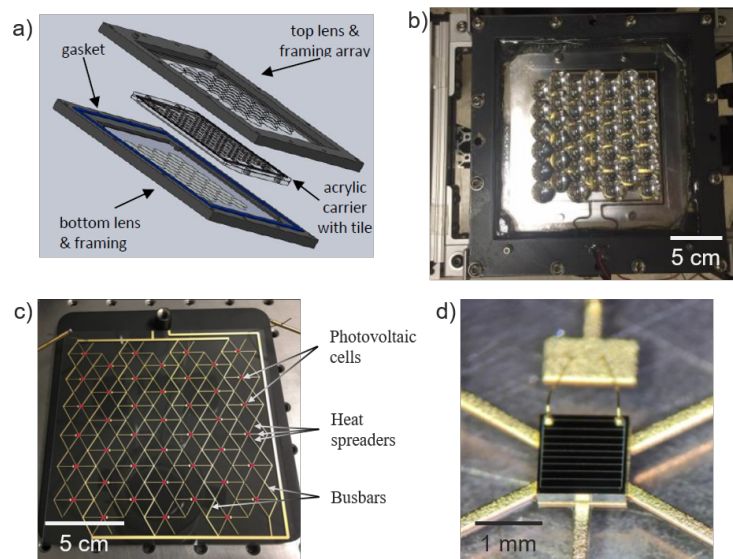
Prototype module components: a) Exploded view of lens arrays with carrier tray and receiver tile b) Top view of assembled module with with clamping frame c) Receiver tile with 42 cells in position emitting light under forward bias d) Image of photovoltaic cell soldered onto electrical traces with wire bond connections
